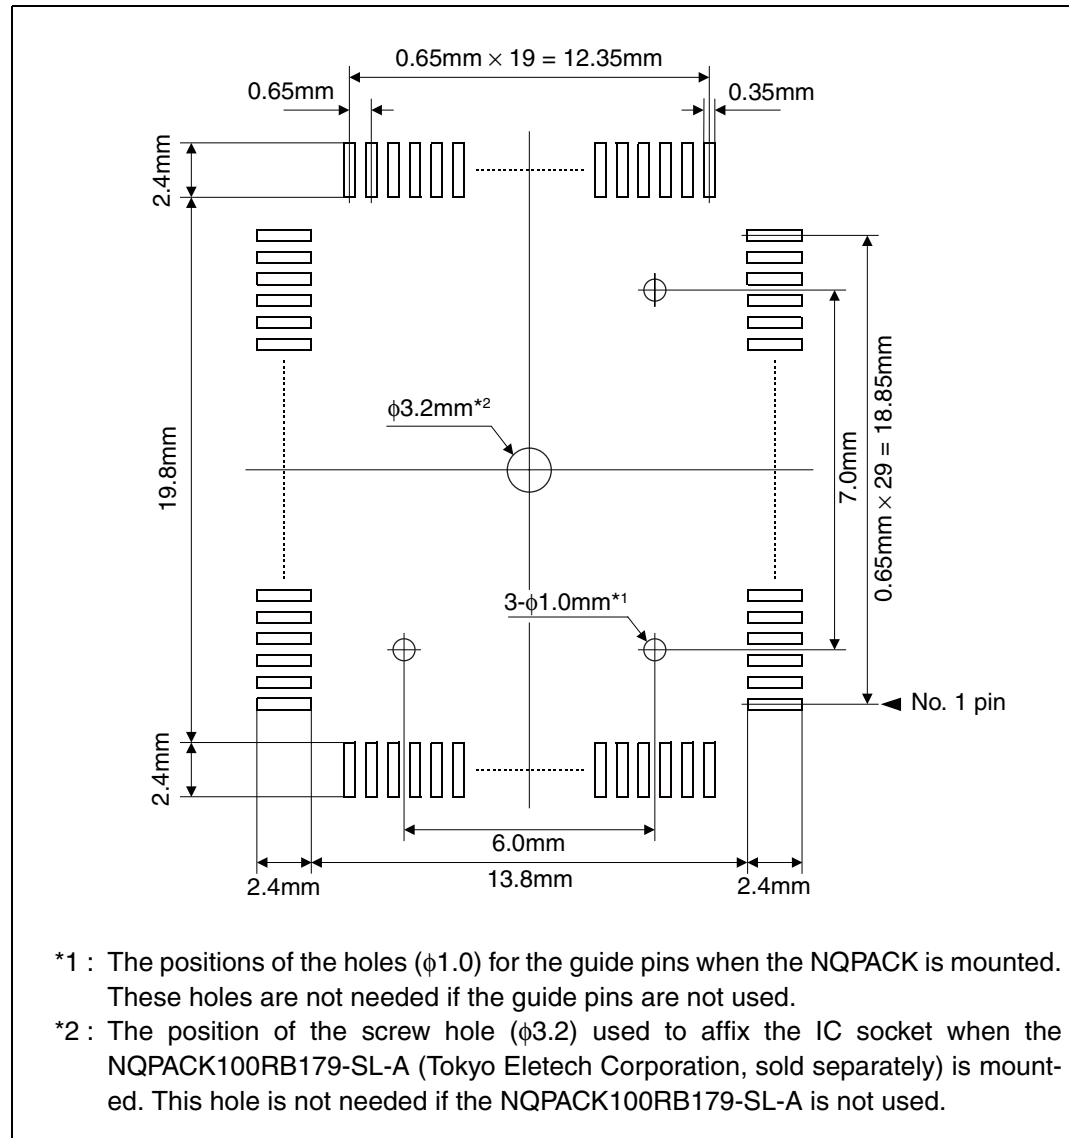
Recommended dimensions of the footprint for mounting the NQPACK
